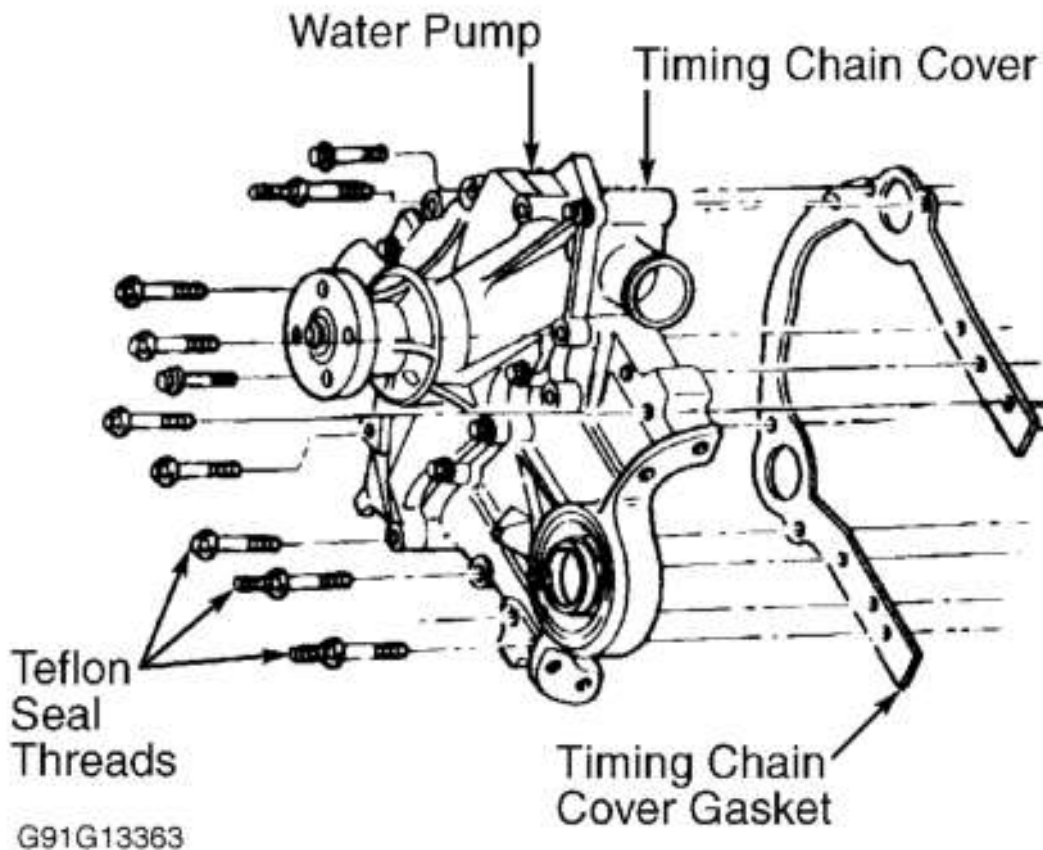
Removing & Installing Water Pump & Front Cover Assembly
